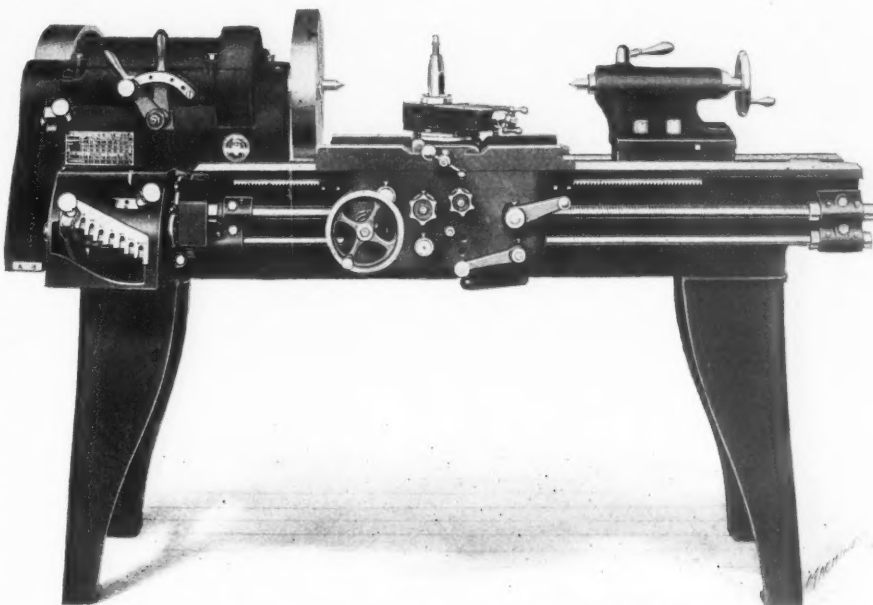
Monarch 14-inch Lathe equipped with Single Pulley Drive
